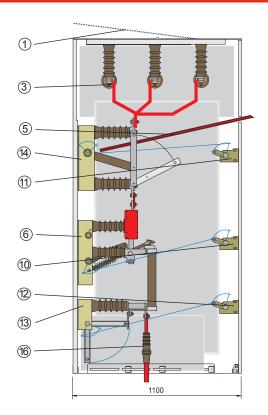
24 kV Transformer feeder panel with switch-disconnector H 27 SuT
